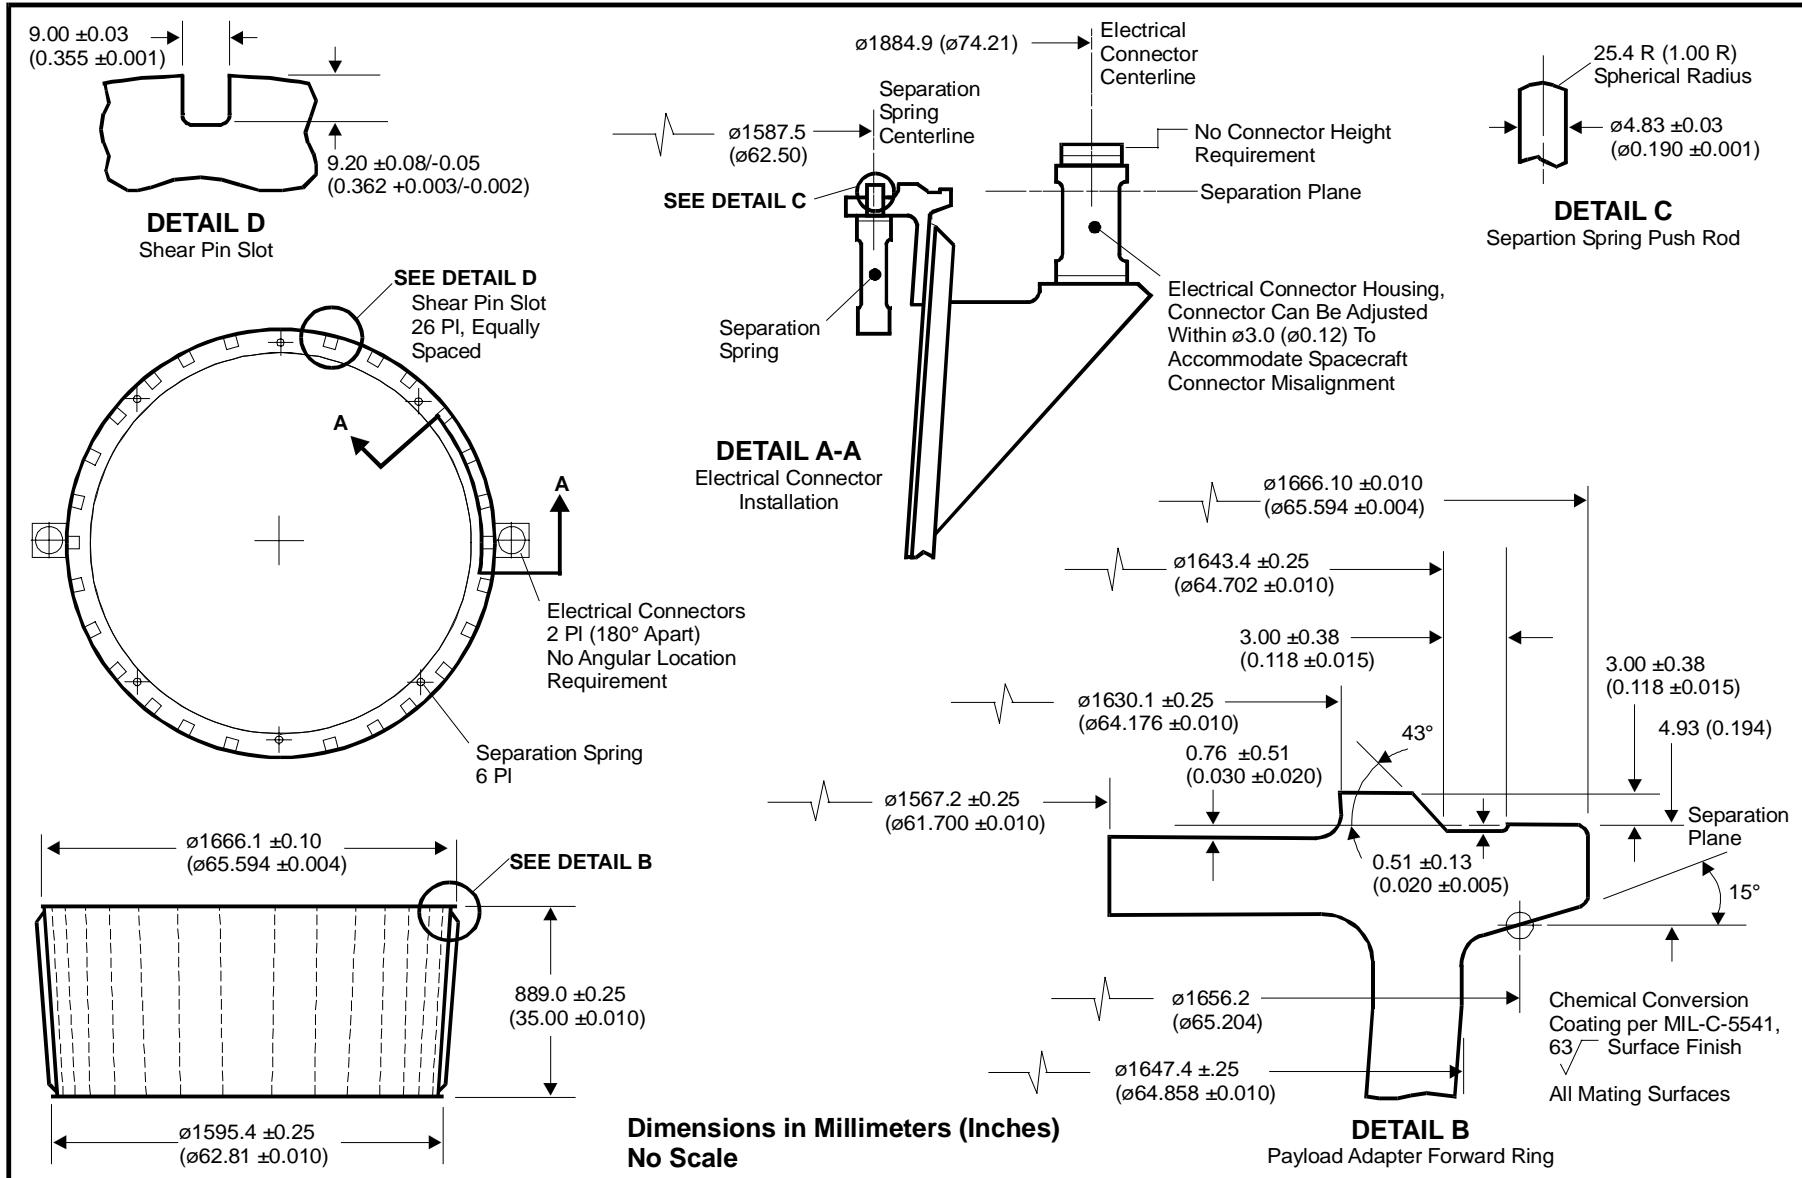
Type D Payload Adapter Mechanical Interfaces
